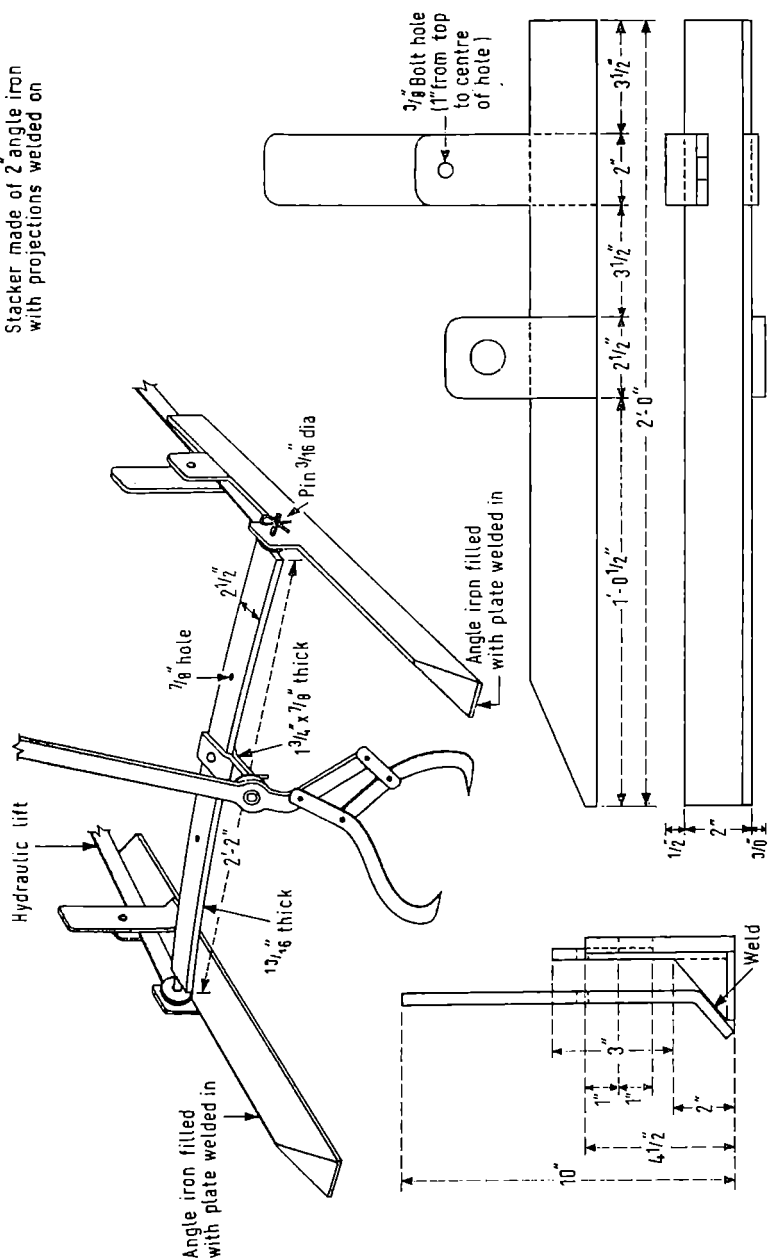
Stacking attachments, Mark I, to fit Standard drawbar; details above, assembly below.
